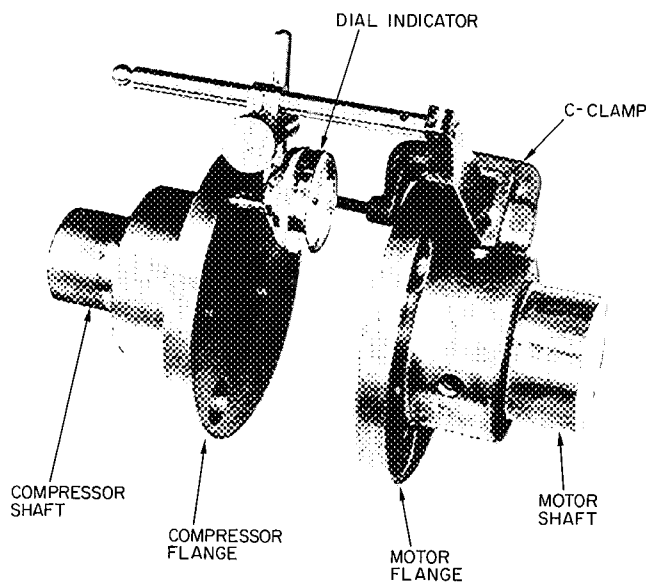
Dial Indicator Set Up to Check Angular Alignment
